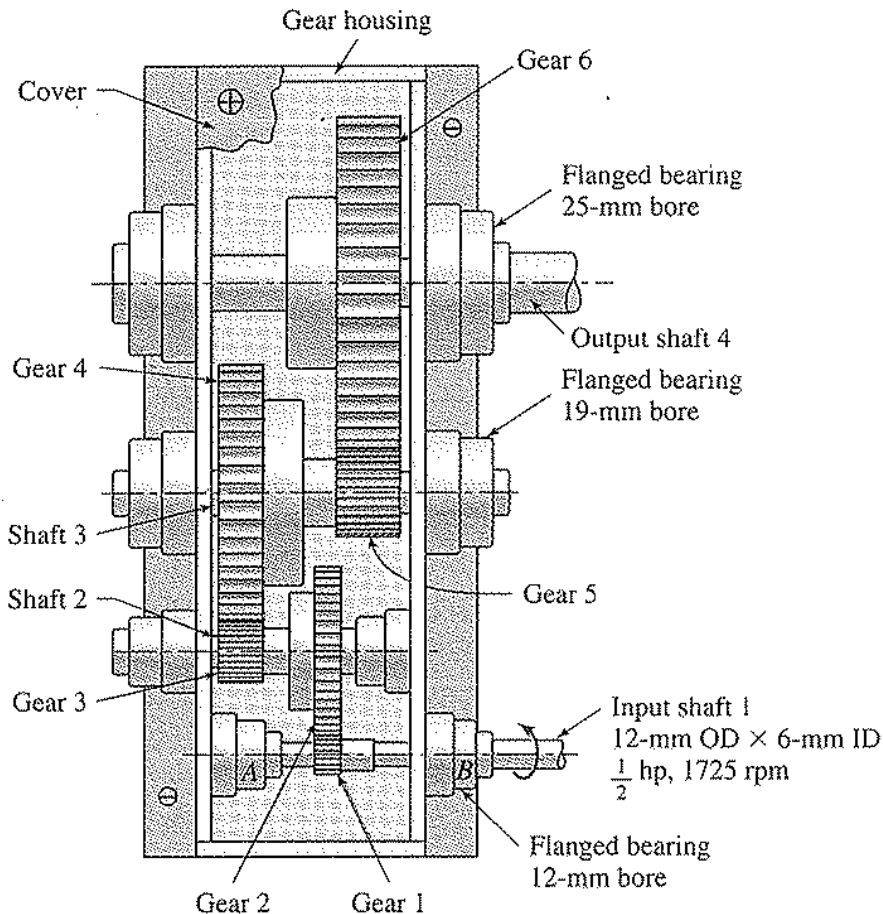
Gearbox of the winch crane shown in Figure 1.4.
